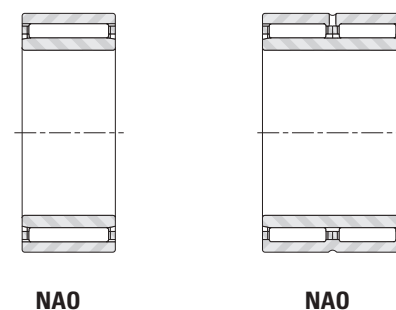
Needle roller bearings without flanges, with inner rings
